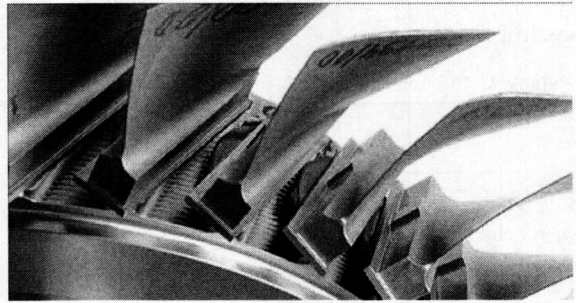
Titanium alloy blisk manufactured by linear friction welding
